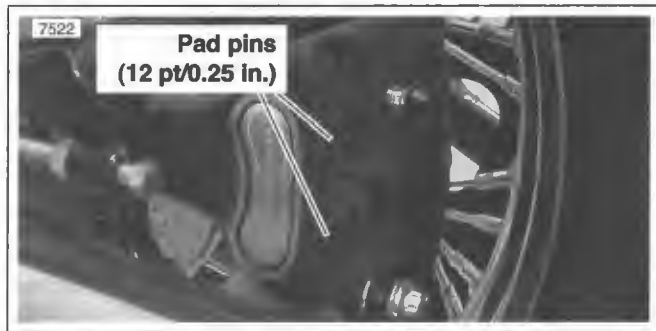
Pad Retaining Bolts (Rear Caliper Shown)
